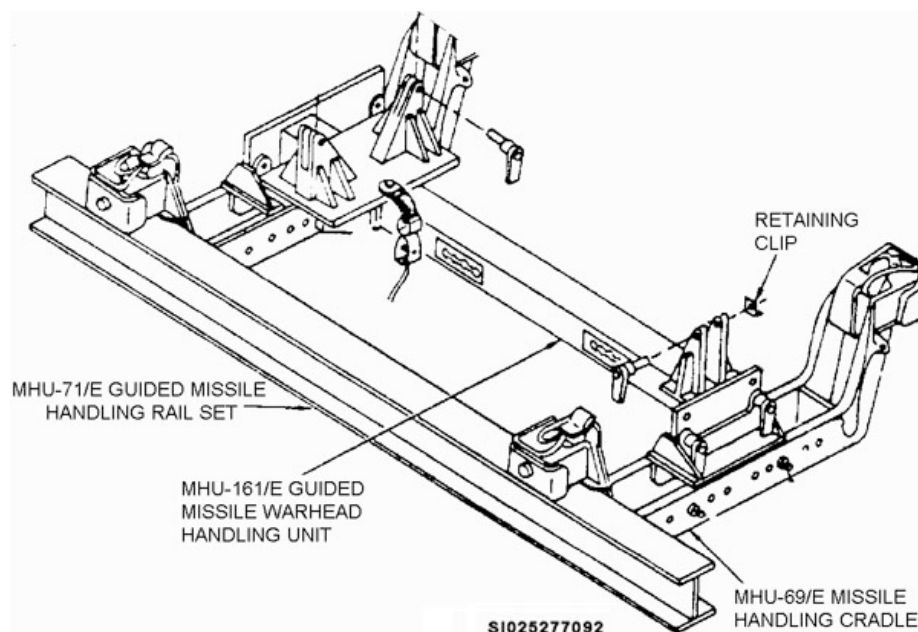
MHU-161/E guided missile warhead handling unit.
